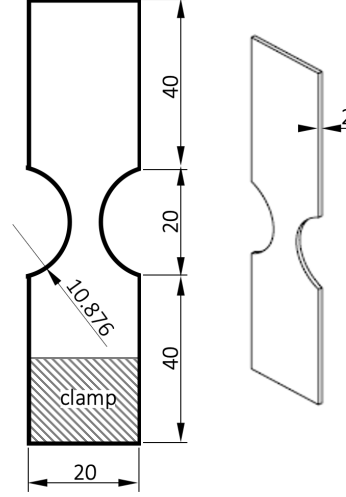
Geometry and dimension of the symmetrical specimen (Unit: mm)
